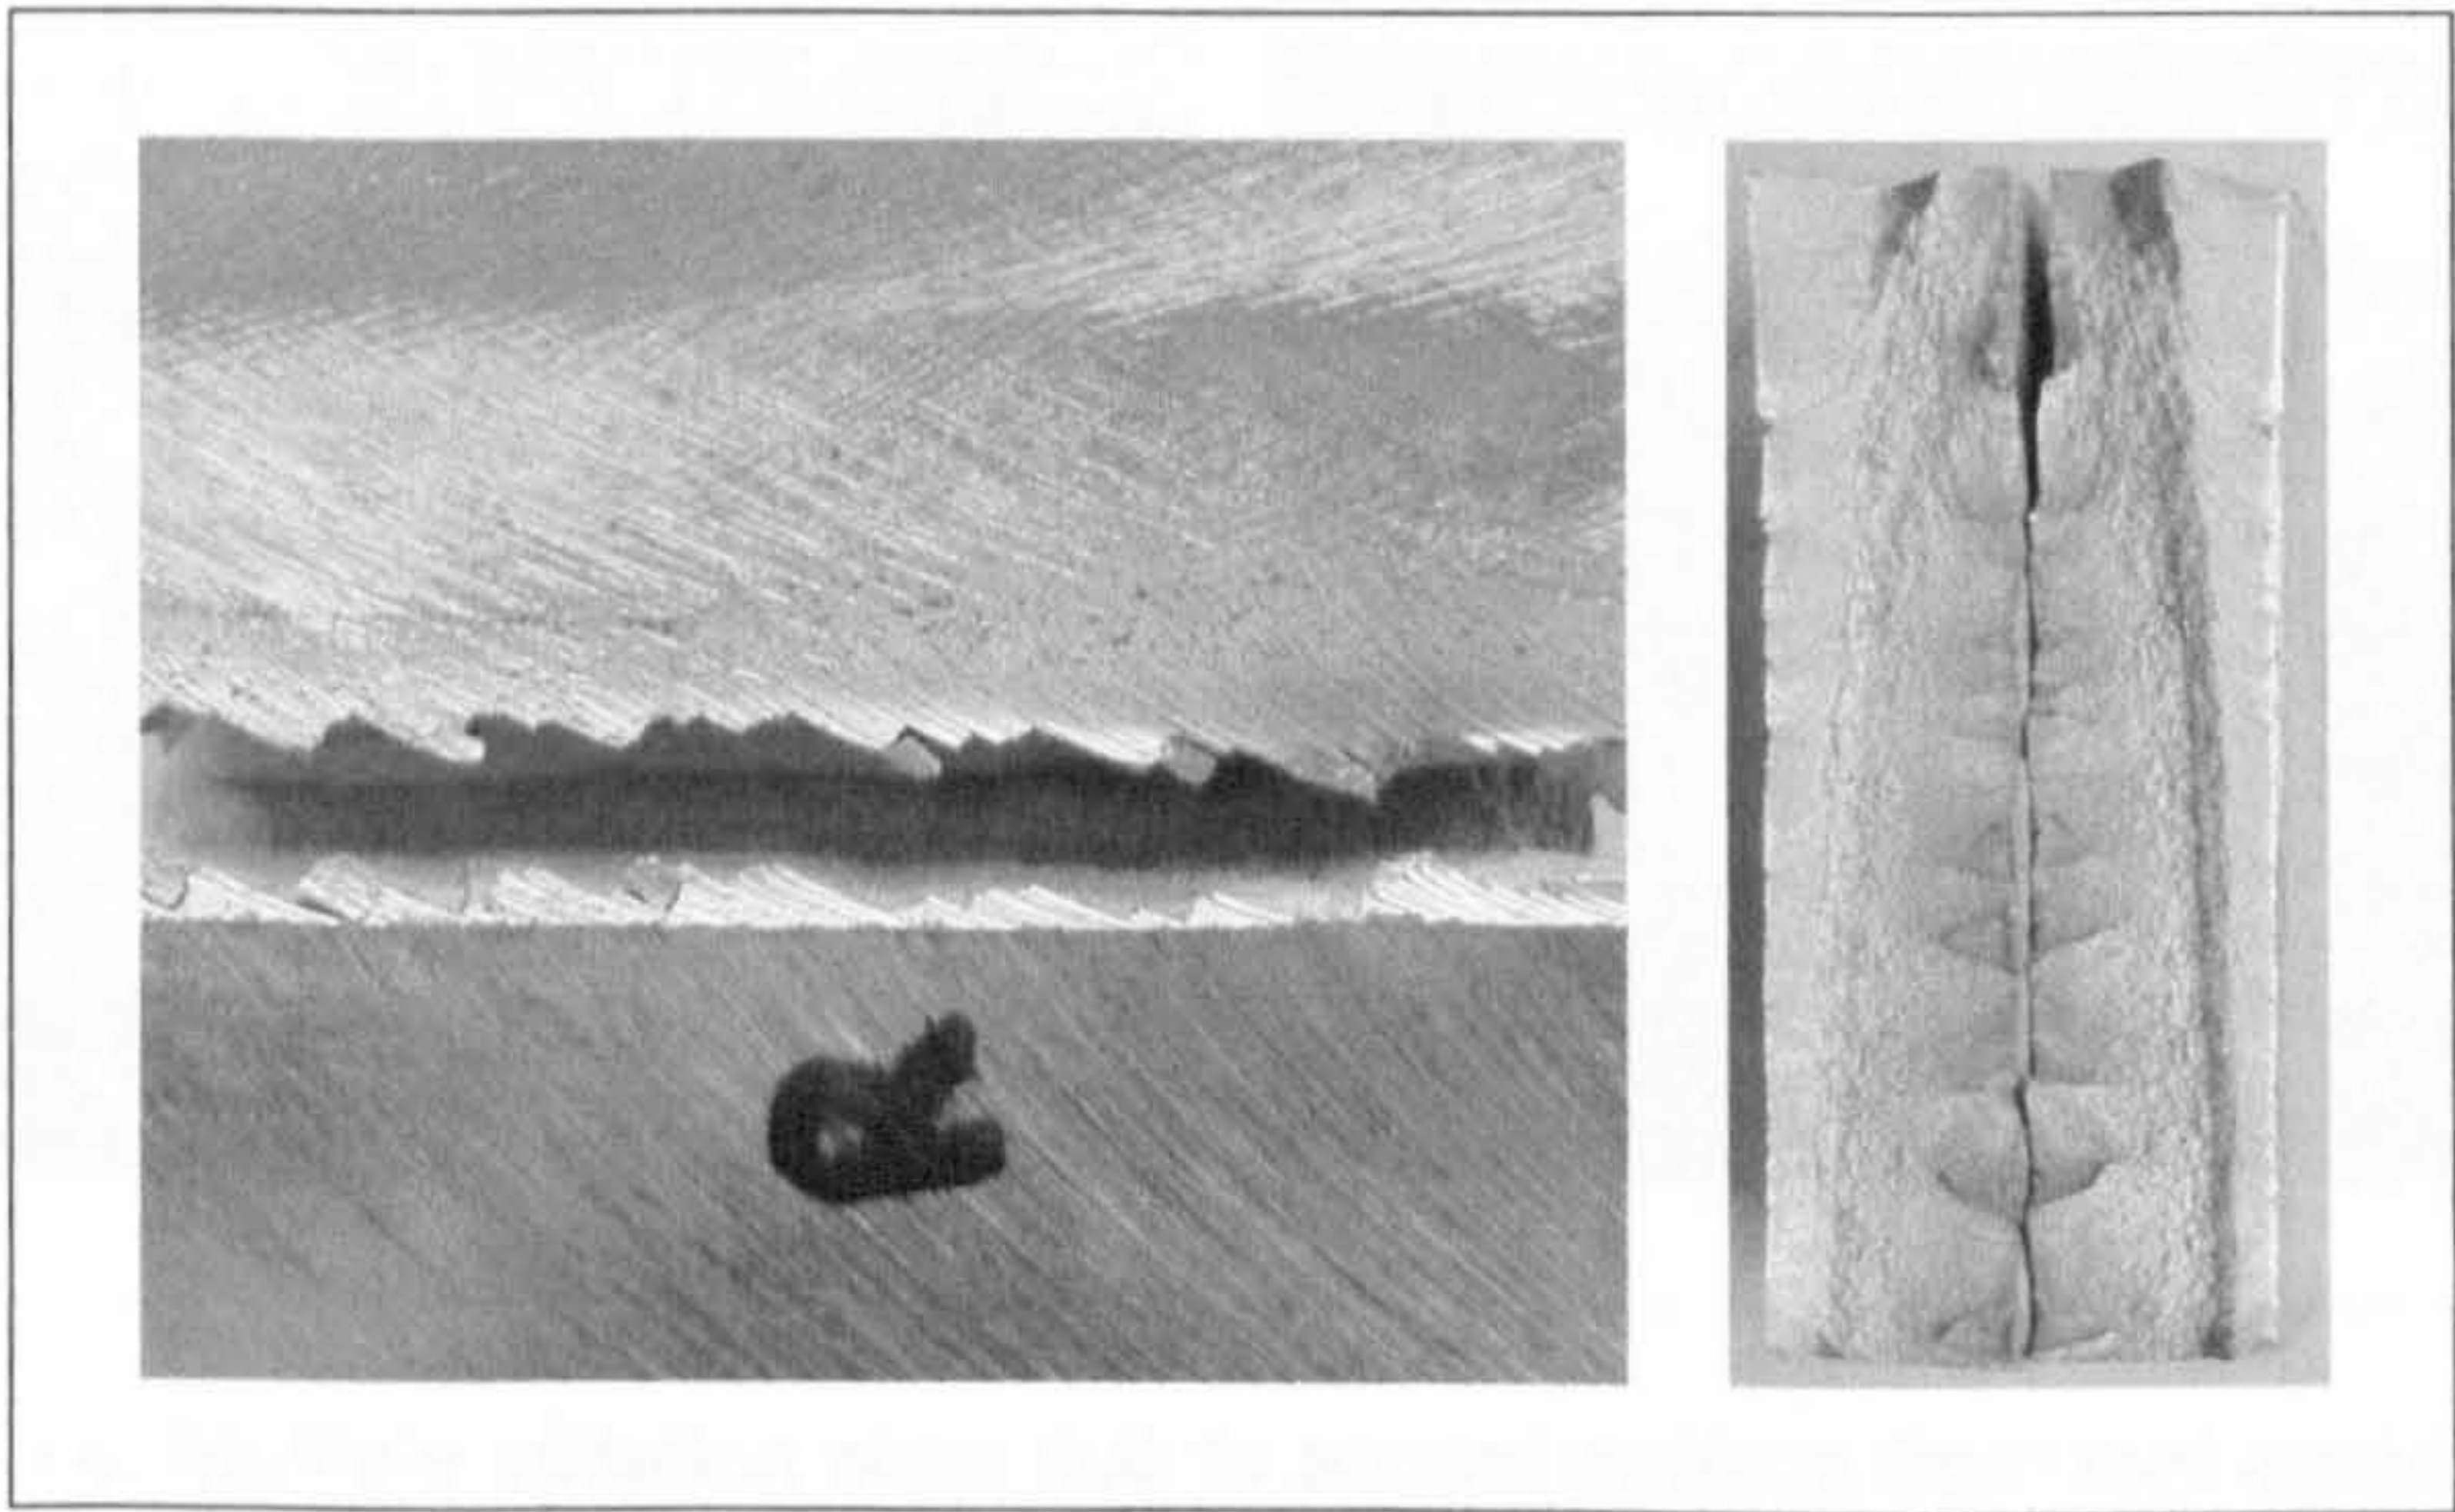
Multiple initiation sites, fracture path, TMAZ upper, HAZ lower, (left) and fatigue surface (right) at retreating side of the tool shoulder, (FS DP 1).
